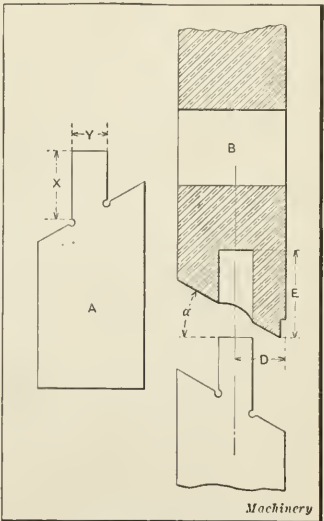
Flat Gage for measuring Milled Slot in Ring
